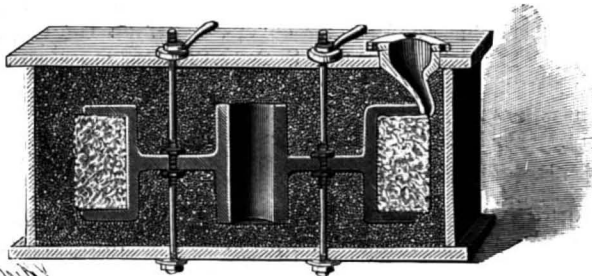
MOULD FOR LAGGING IRON WHEEL.
